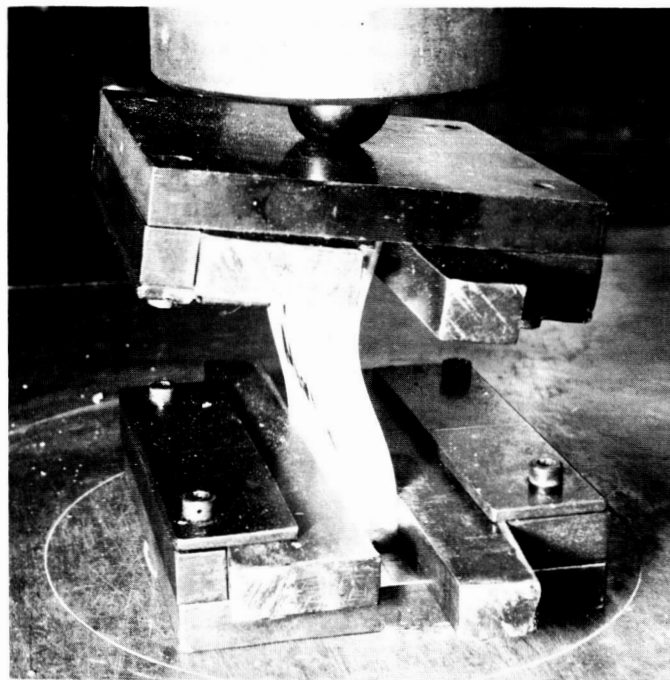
Standard Test Fixture and Upper Sandwich Panel Test Specimen Following Loading in Edgewise Compression
